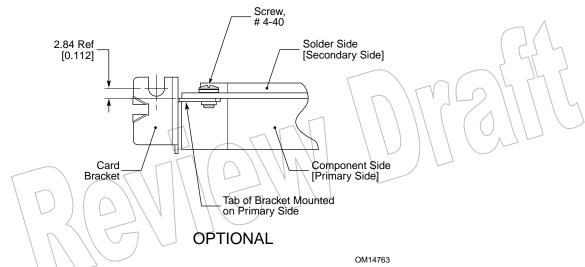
Bracket Design with the Mounting Tabs Mounted on the Primary Side of the Add-in Card
